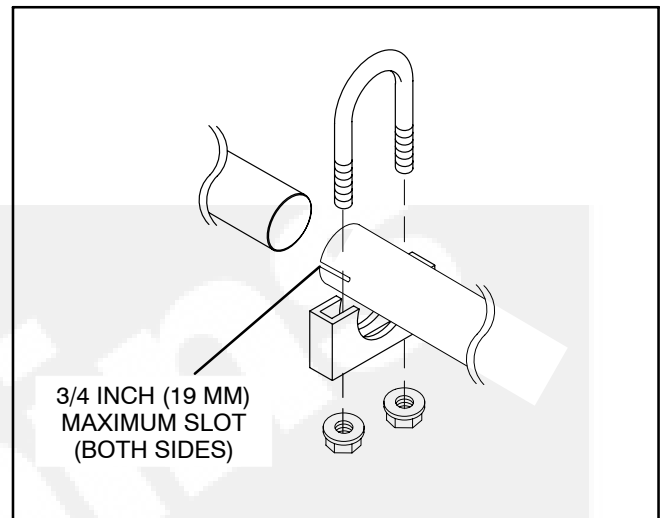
EXHAUST TAIL PIPE CONNECTIONS
